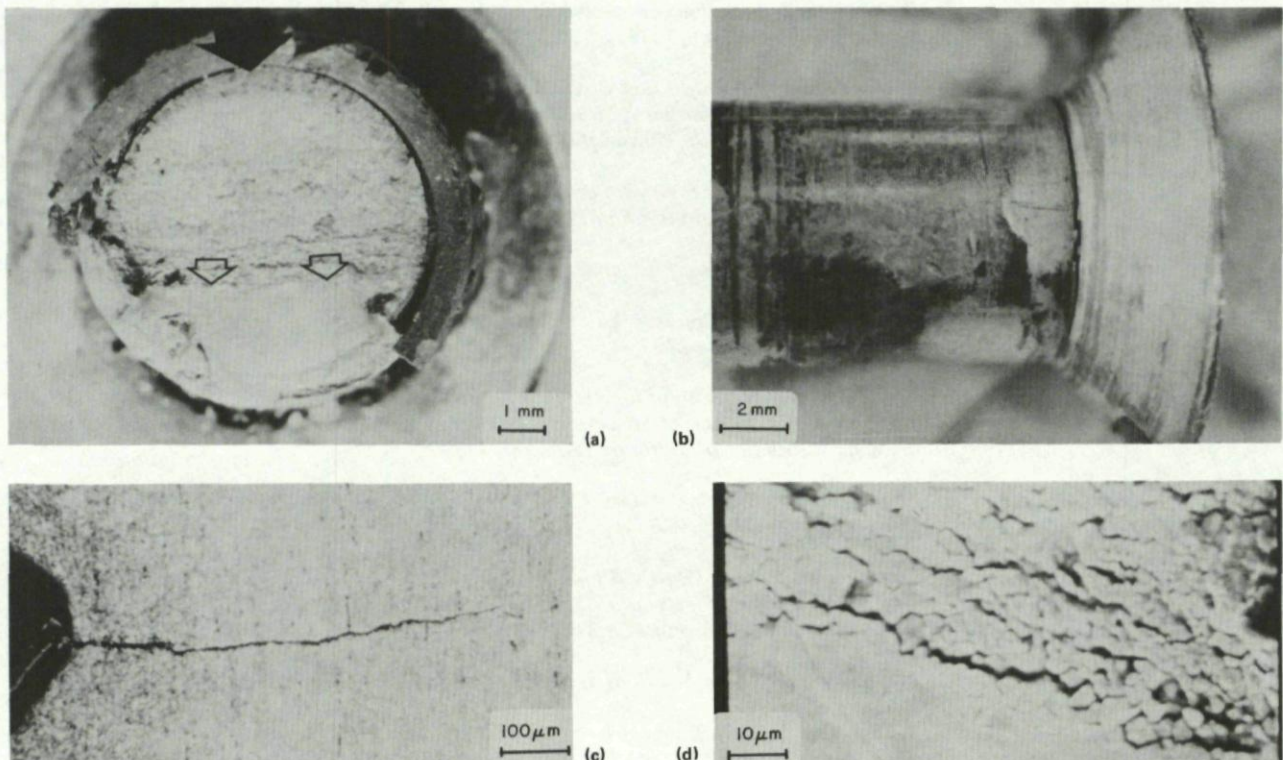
Corrosion induced failure of a 1040 plain carbon steel bolt, case history 13-17.
